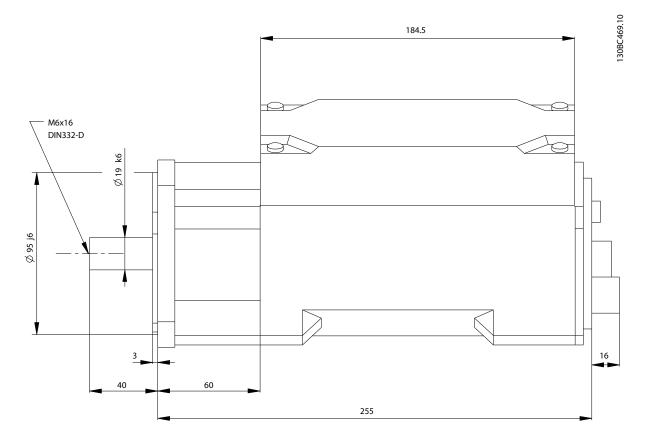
Side View: Servomotor with IEC Flange and Brake
